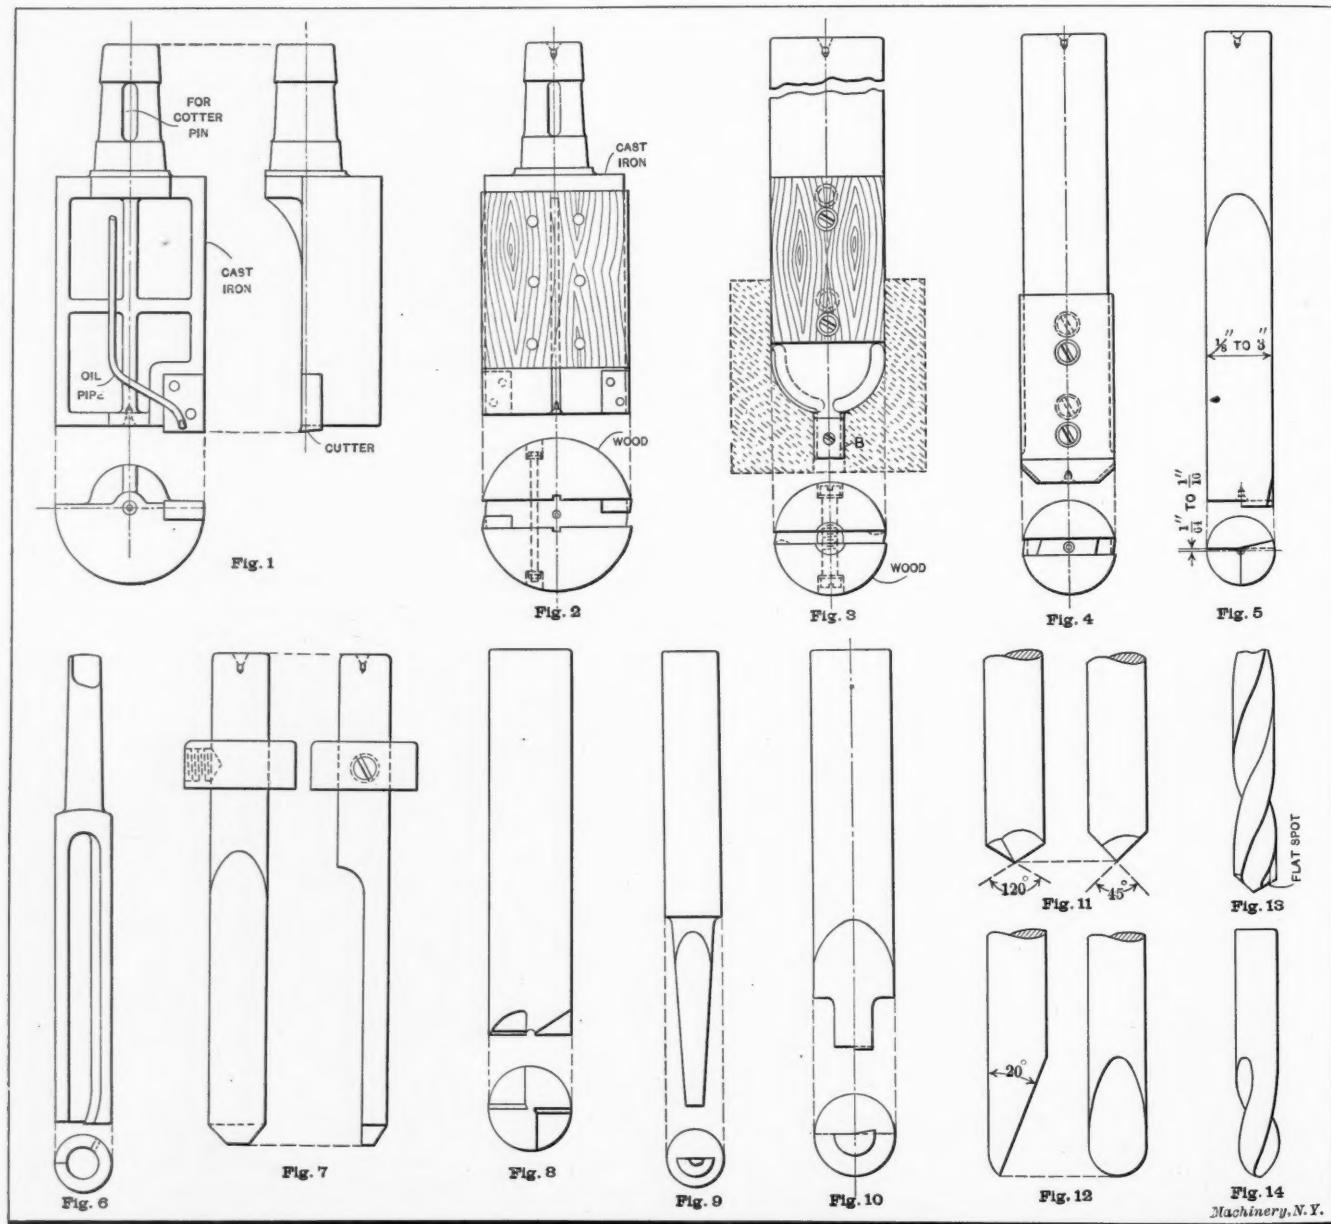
shows a drill that is made from drill rod by filing square cutting edges as shown, and it is used for squaring up the bottoms of small holes of odd sizes. A taper reamer that is also made from drill rod is shown in Fig. 9. This tool is much used on drop-forged dies, in which small taper holes are often needed for projections in the finished work, such as parts to be riveted, etc. Another useful tool for drop-forged work, that is made from drill rod is shown in Fig. 10. A little
